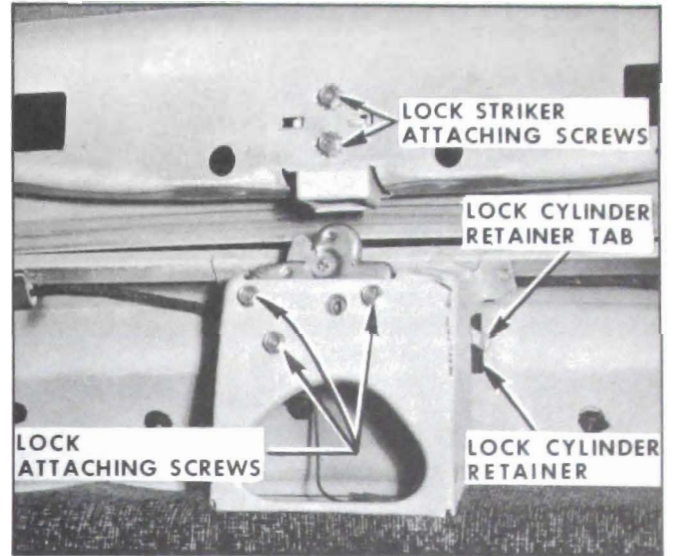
Rear Compartment Lid Lock Cylinder Removal
